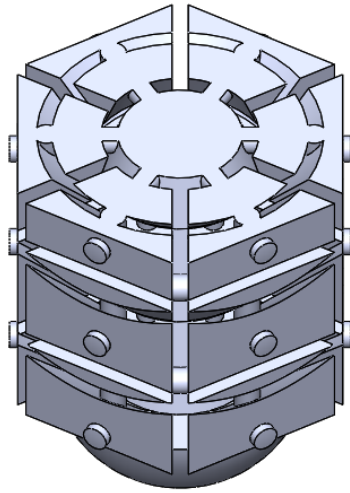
MIMO - Small Cavity AMM - Internal Cavity CAD - Horizontal Cross-Section View
